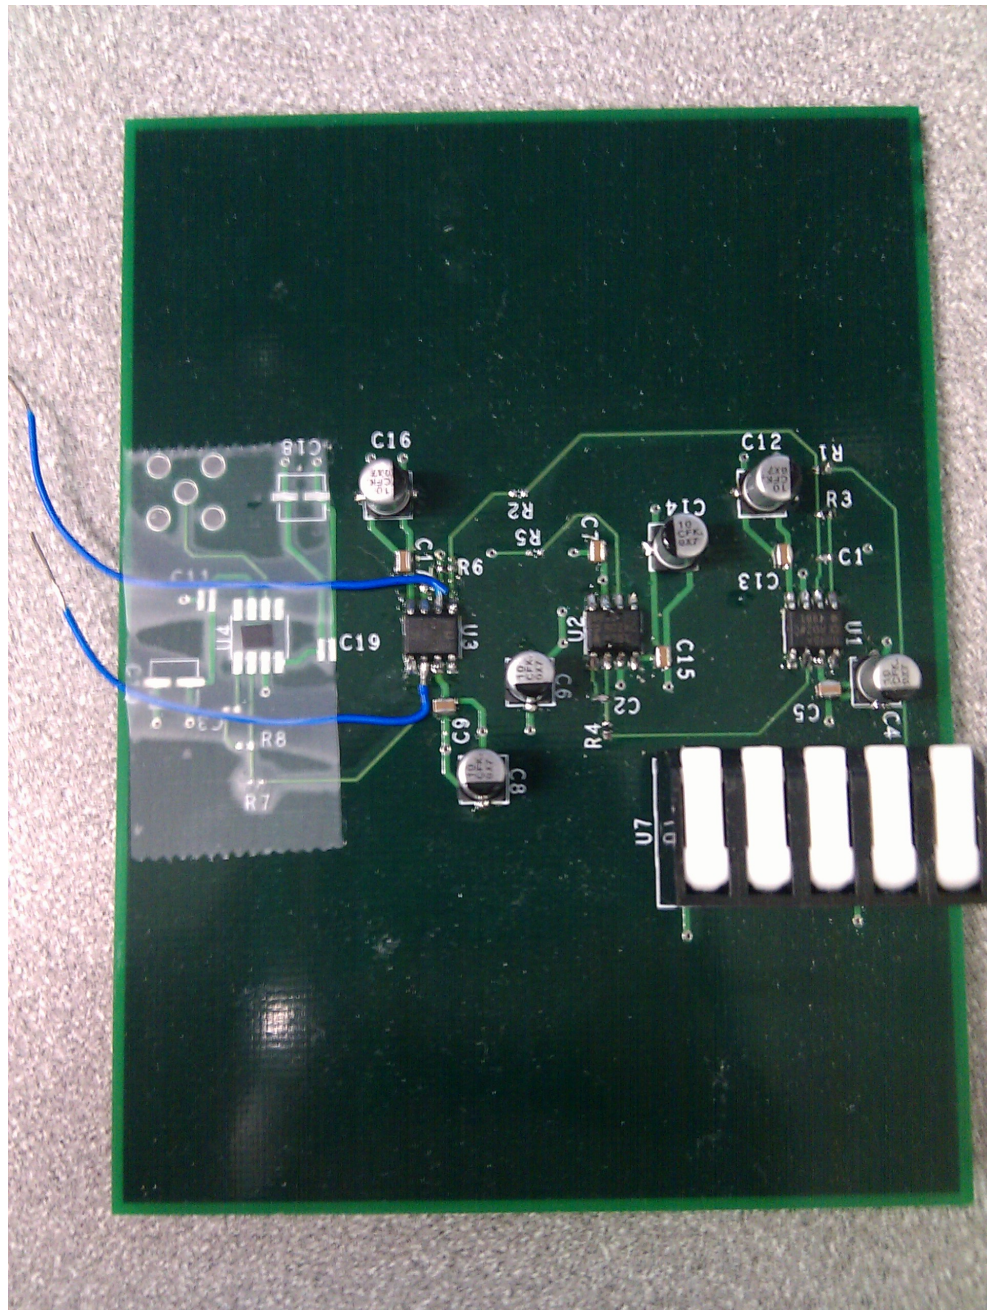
Filter test PCB with 30 AWG wires for debugging.
